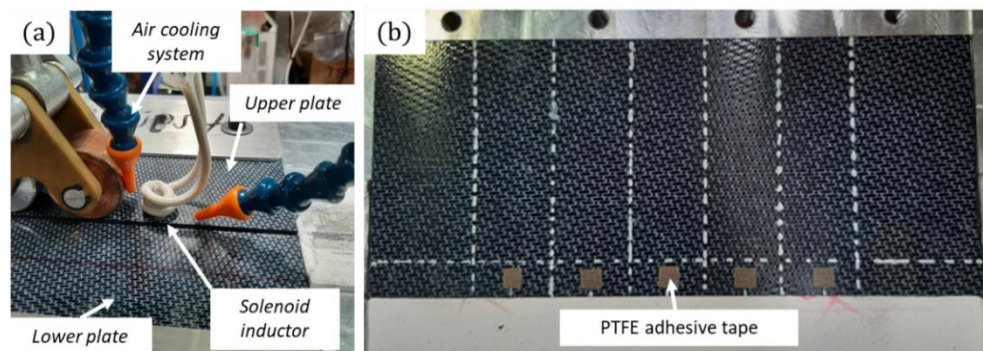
(a) Relevant components of Induction welding system. (b) PTFE adhesive tapes placed in the joint line for obtaining defective welds in a fully controlled way.
